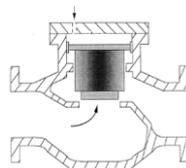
Pressure Reducing Valves - Controlled by piston [11].
